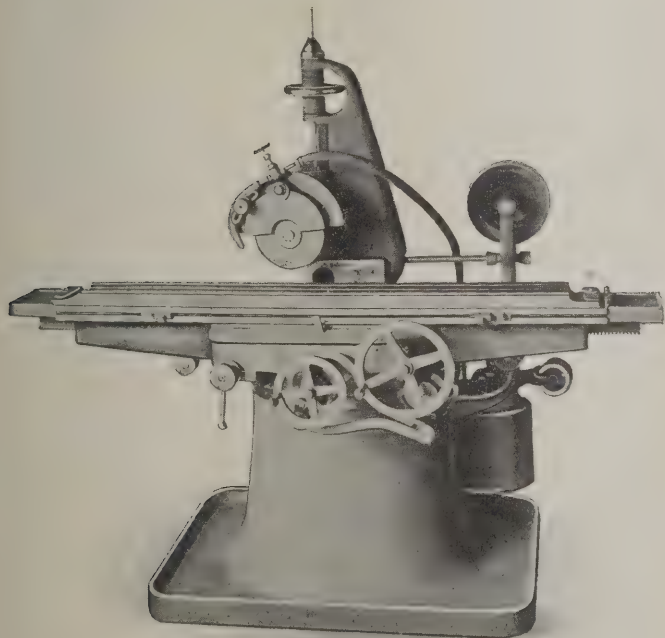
The Bath Grinder arranged for Surface Grinding.
